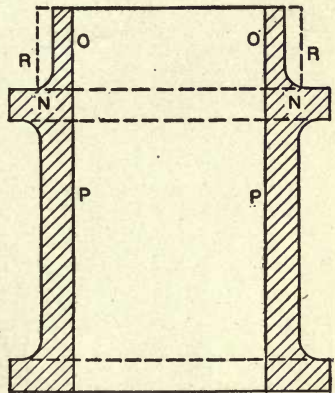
LOCOMOTIVE PUMP CYLINDER SHOWING POSITION OF SHRINK HOLES.
